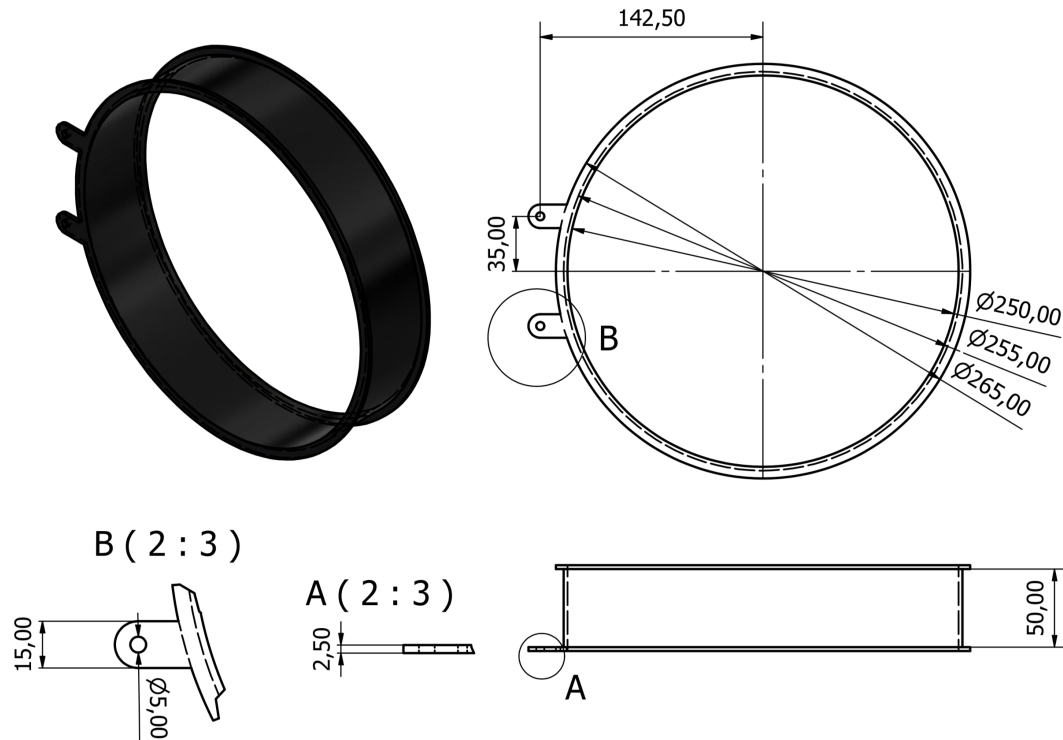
Dimensions diagram for the diamagnetic loop main support in millimeters.
